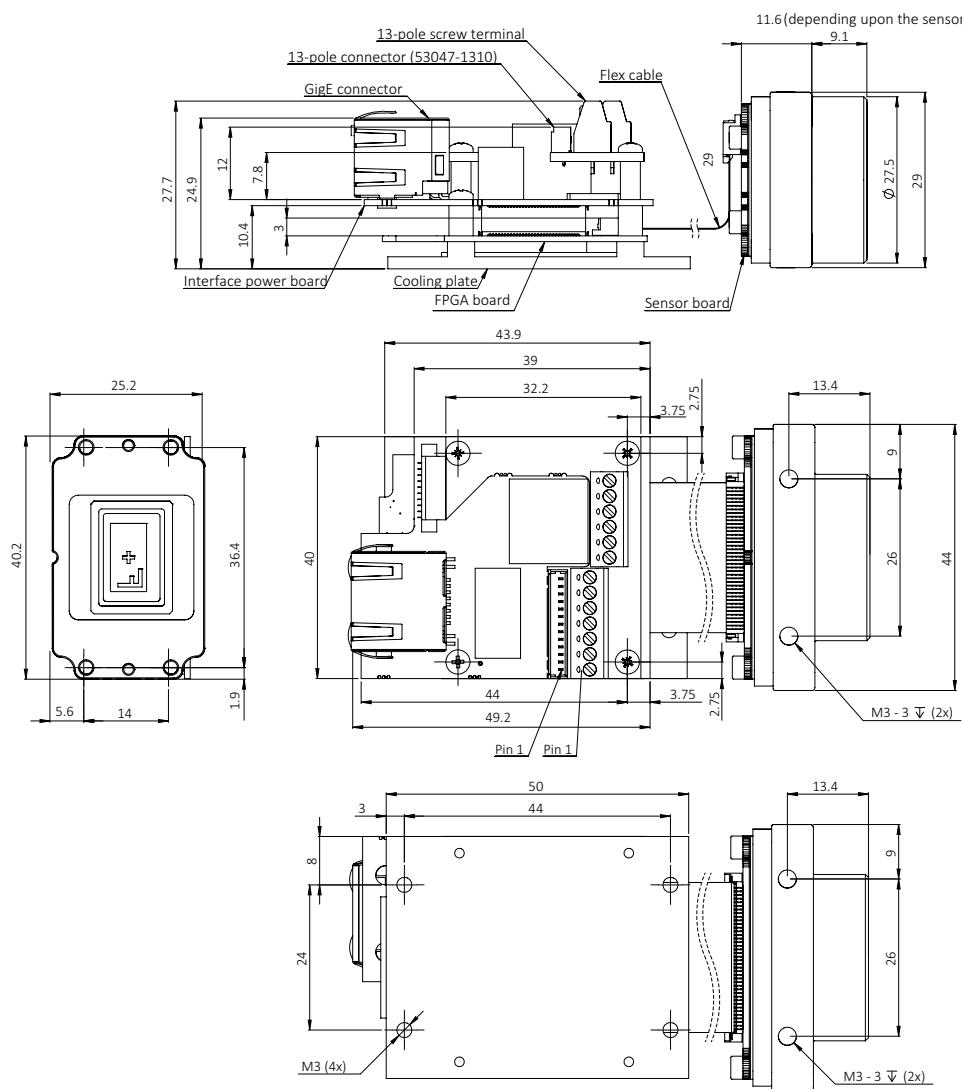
Manta type B board level with C-Mount (PoE and non-PoE models) dimensions
